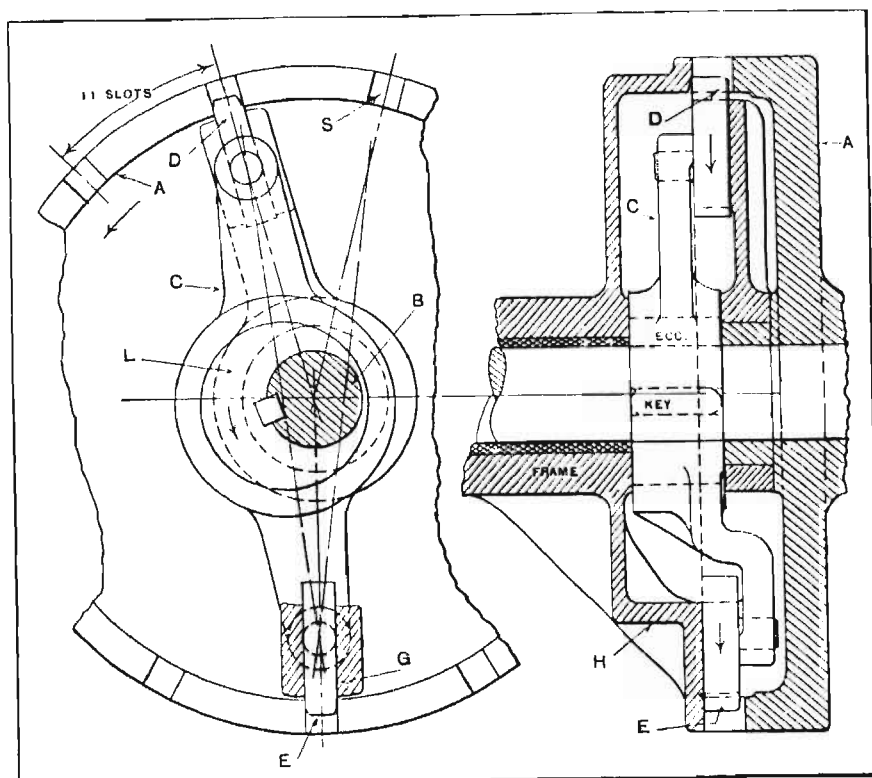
A Constantly Rotating Shaft *B* and Eccentric Imparts a Positive Intermittent Motion to Member *A* which is Locked During the Idle Period
